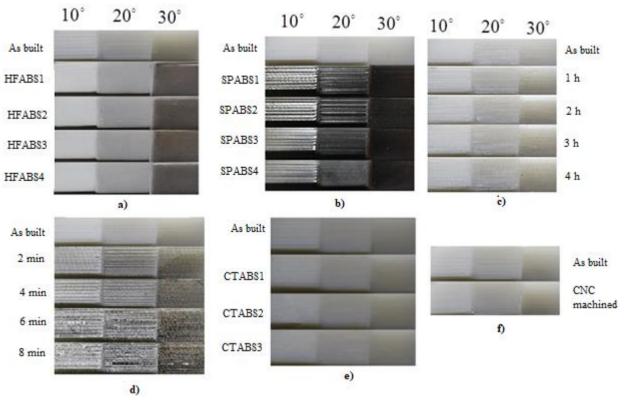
Improvement of surface roughness of ABS test pieces through hand finishing (a), spray-painting (b), tumbling (c), shot peening (d), chemical treatment (e) and CNC machining (f)
